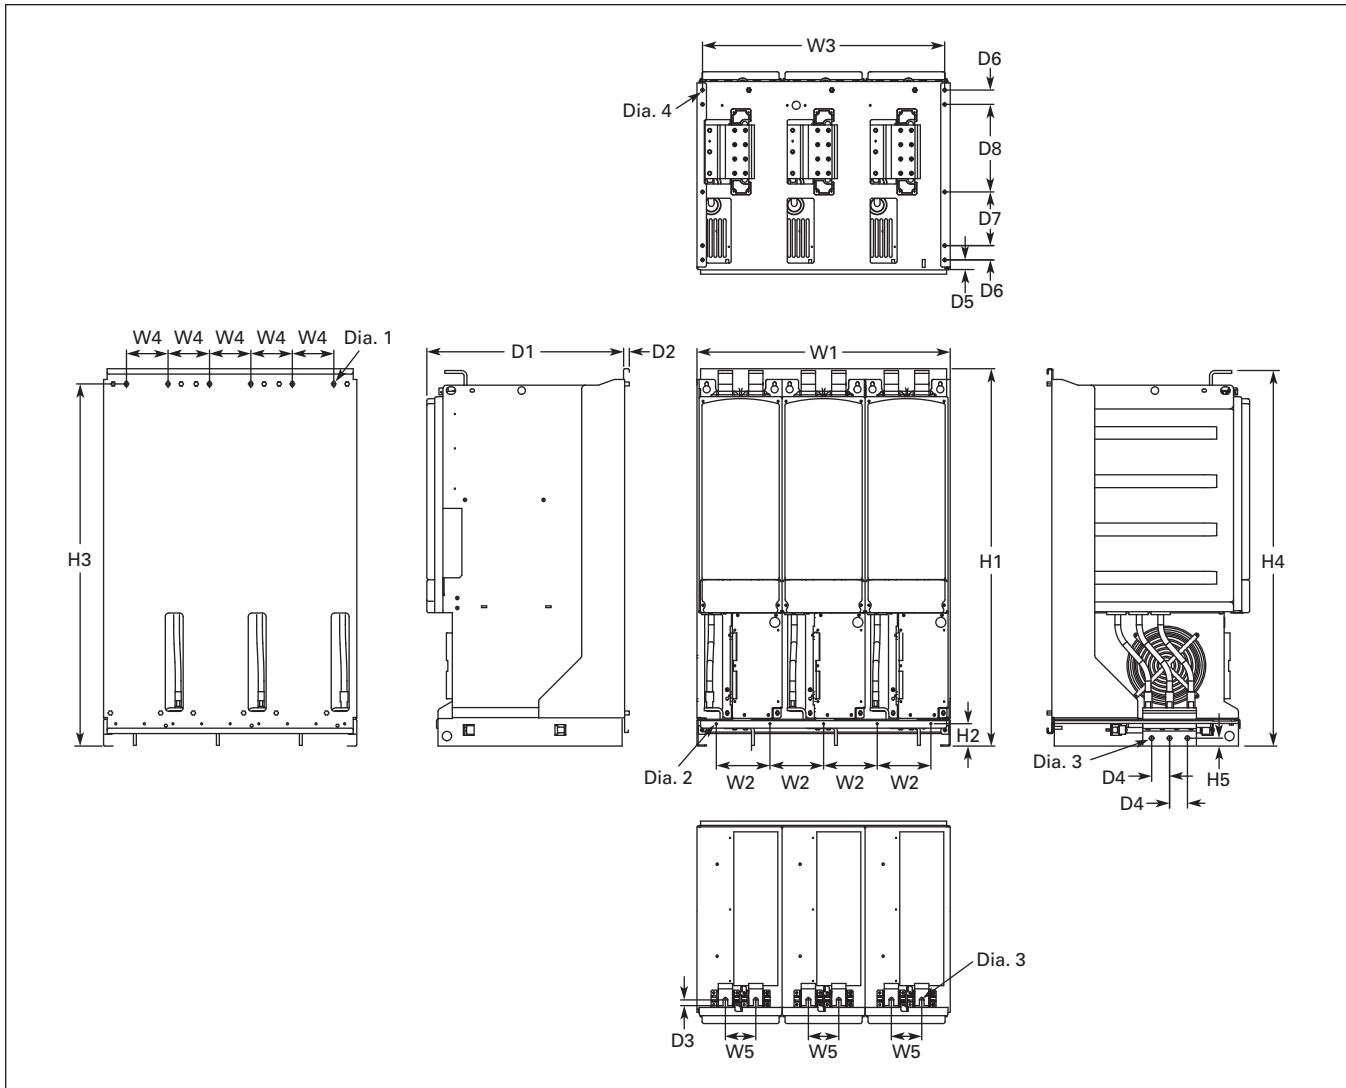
9000X Dimensions, FR13 Open Chassis Inverter
